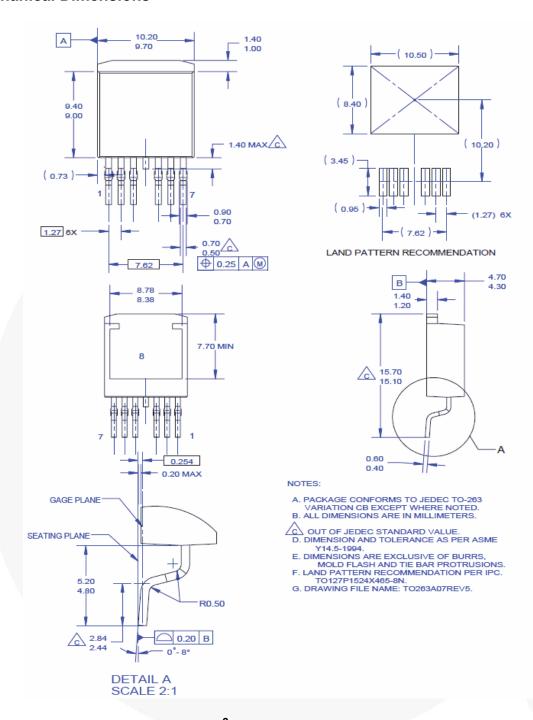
TO263 (D<sup>2</sup>PAK), Molded, 7-Lead, Surface Mount
